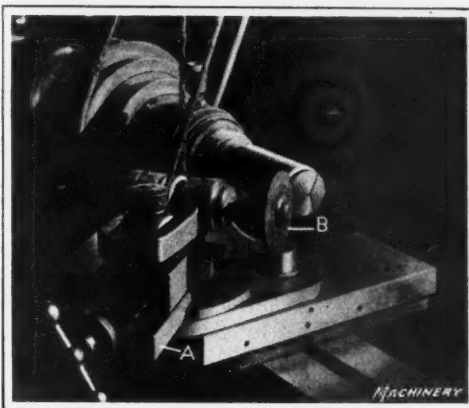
Bench Lathe with Swiveling Slide for Grinding-wheel Head
